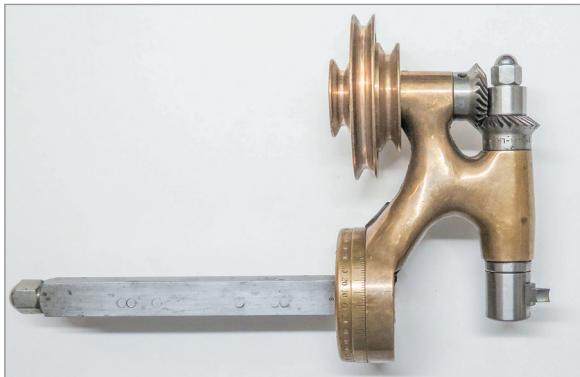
Universal flycutter for rectangular ornamental cutting tools, side view
